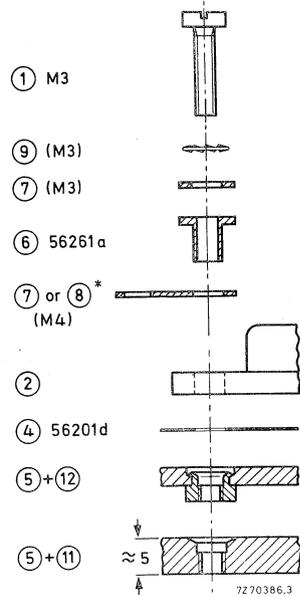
Insulated mounting (500 V) with tapped holes or insert nuts.
